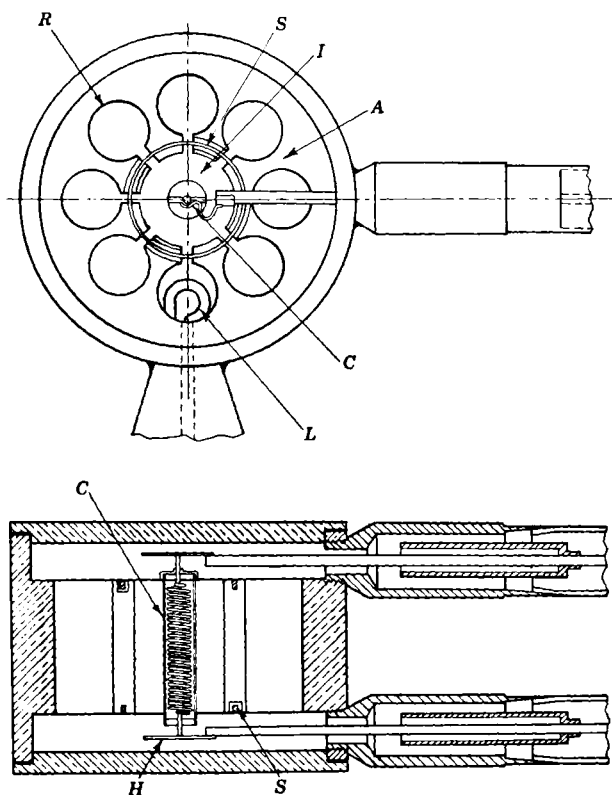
Cross-sectional views of typical magnetron shown in Fig. 1-10.
